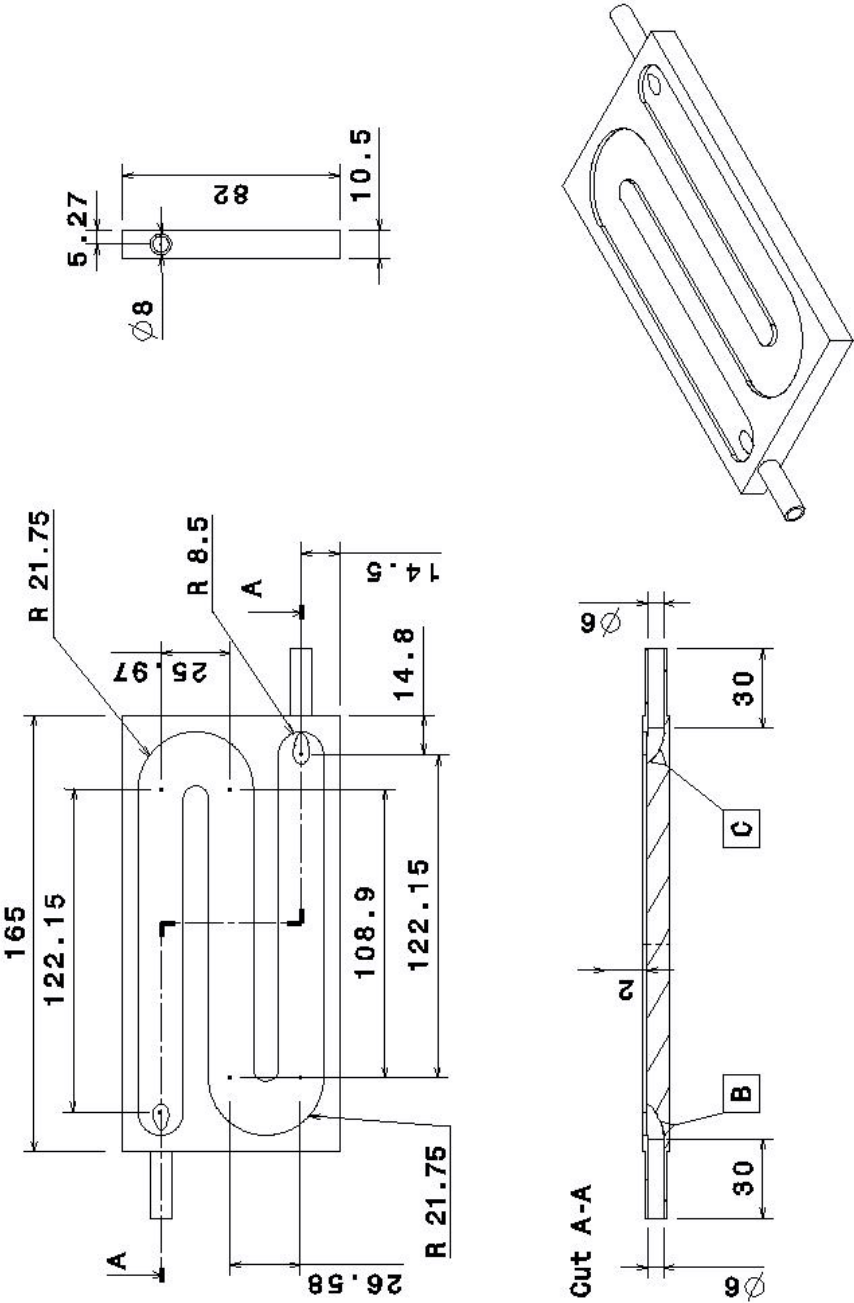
CAD Drawing of proposed Heat Exchanger. All dimensions in mm. Top plate intentionally left out for displaying purposes.
